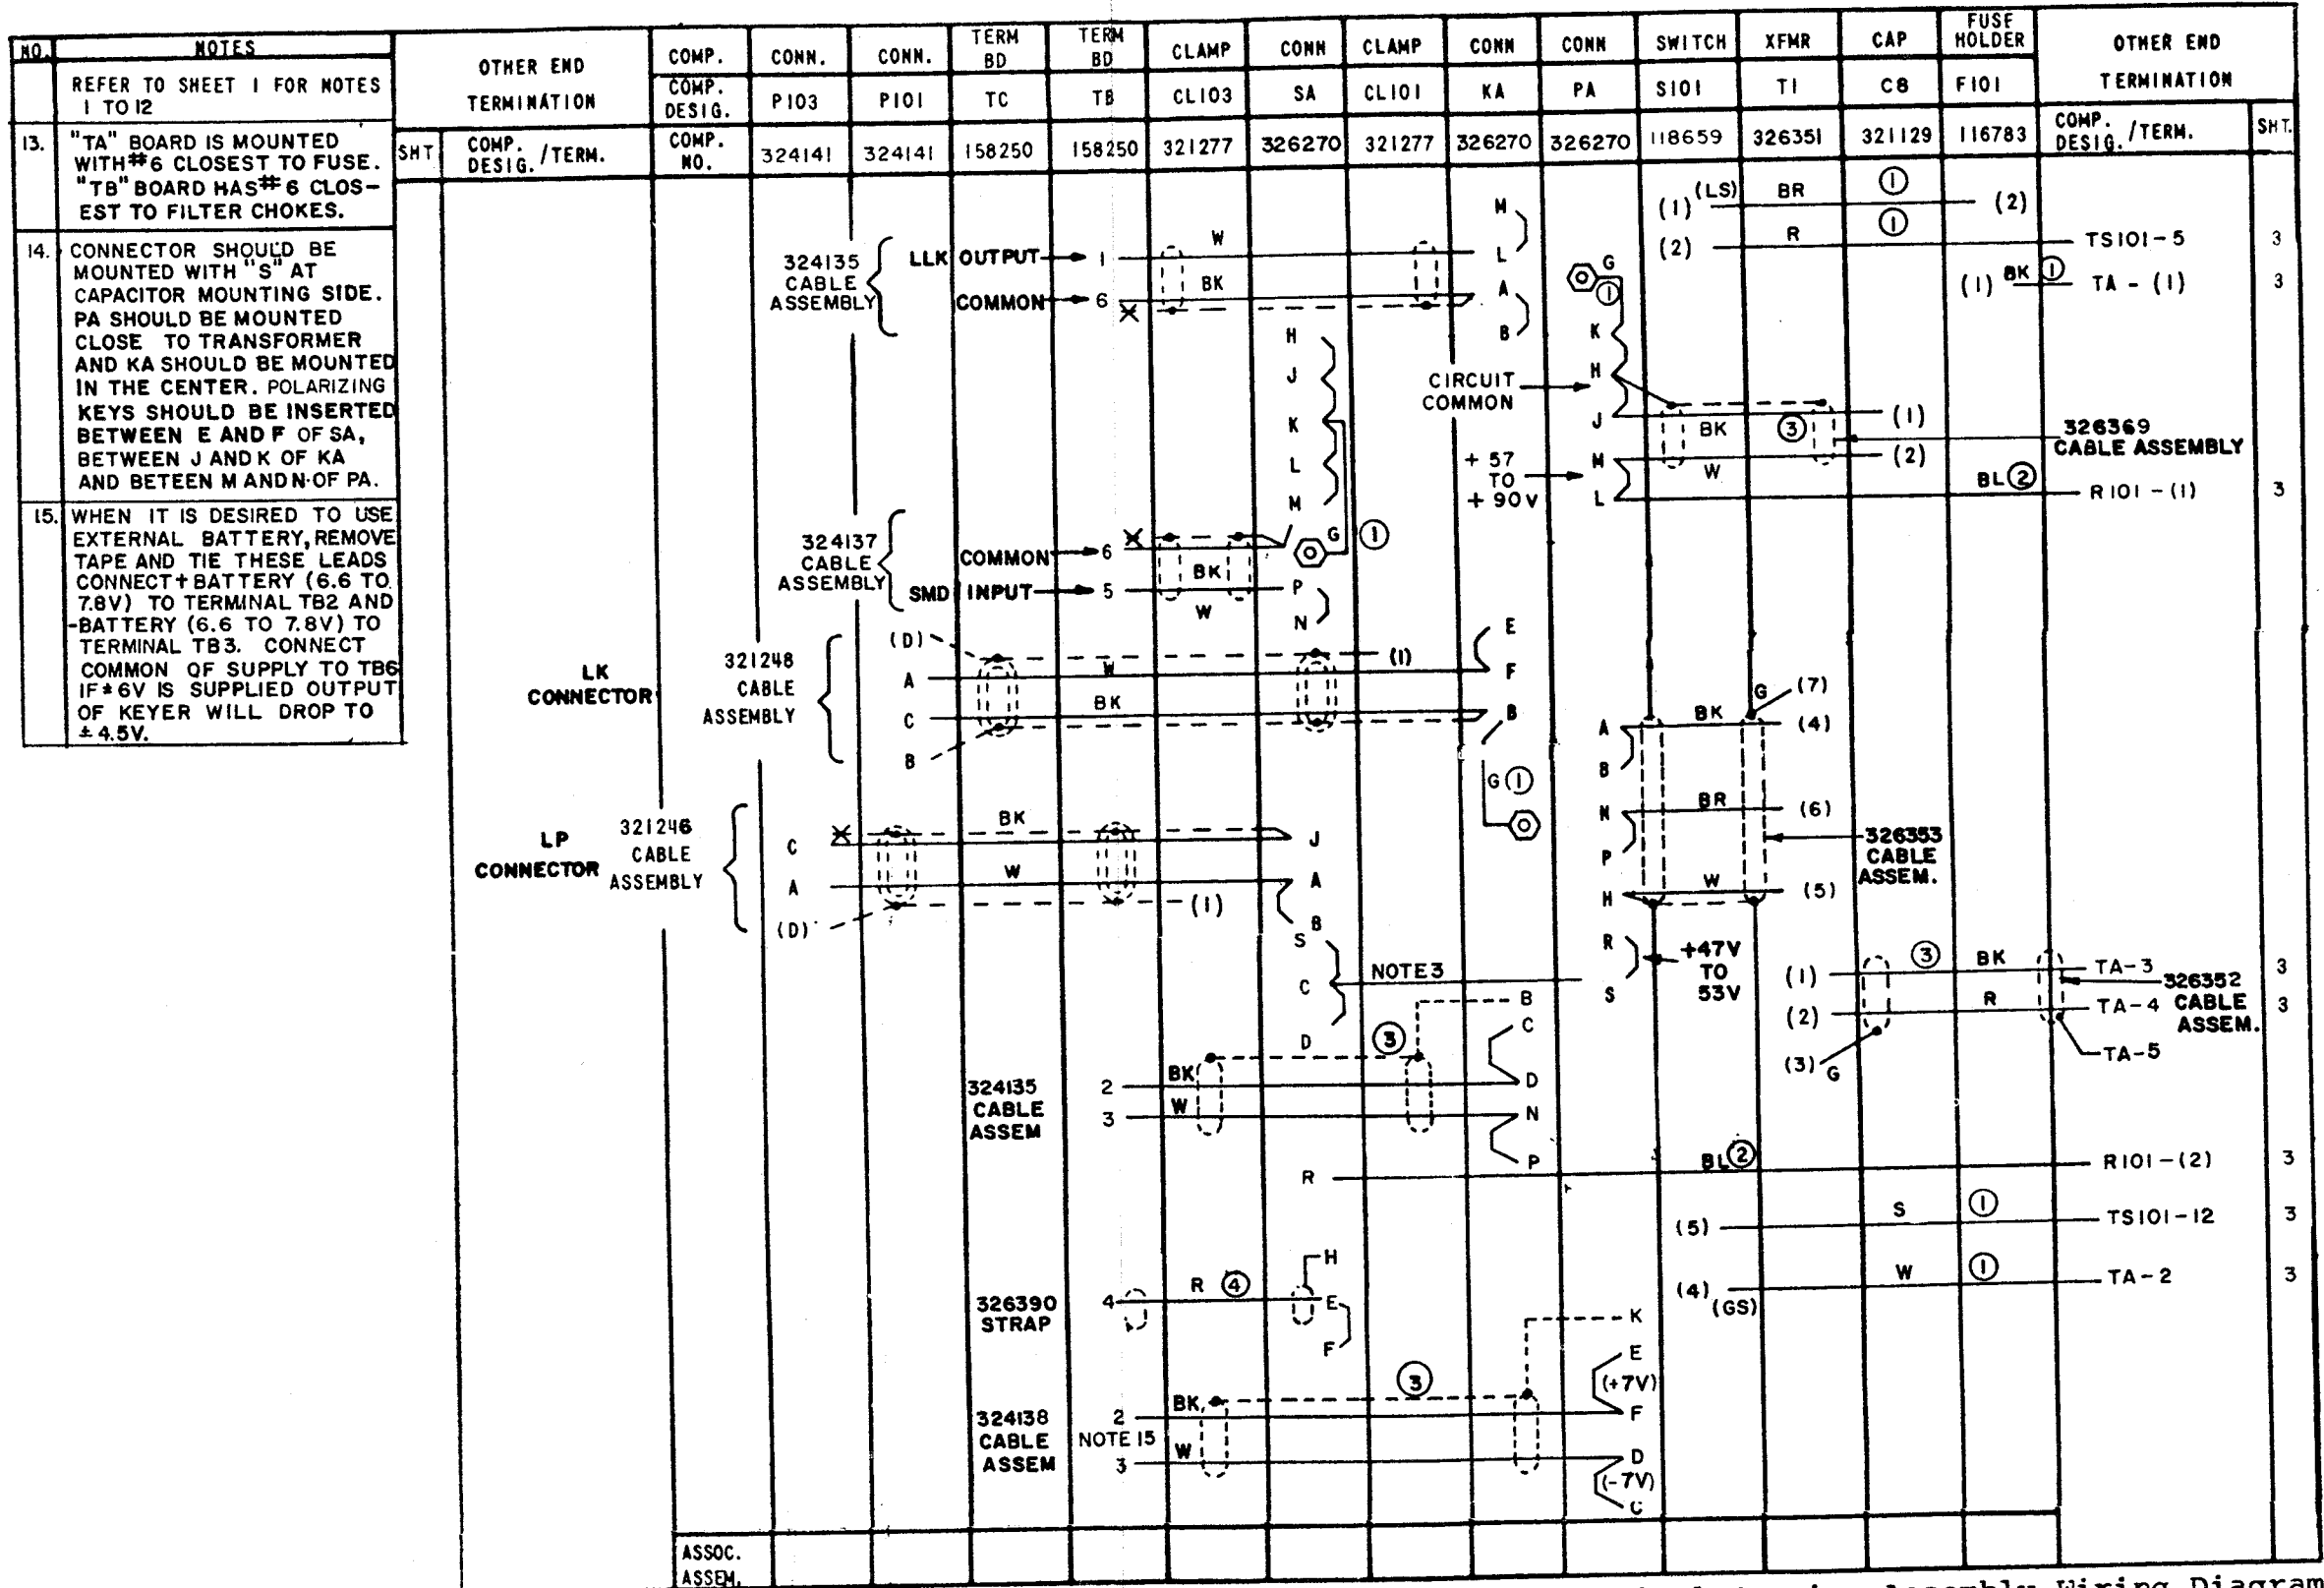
323813 Electrical Service Assembly Wiring Diagram (Sheet 2 of 3)
